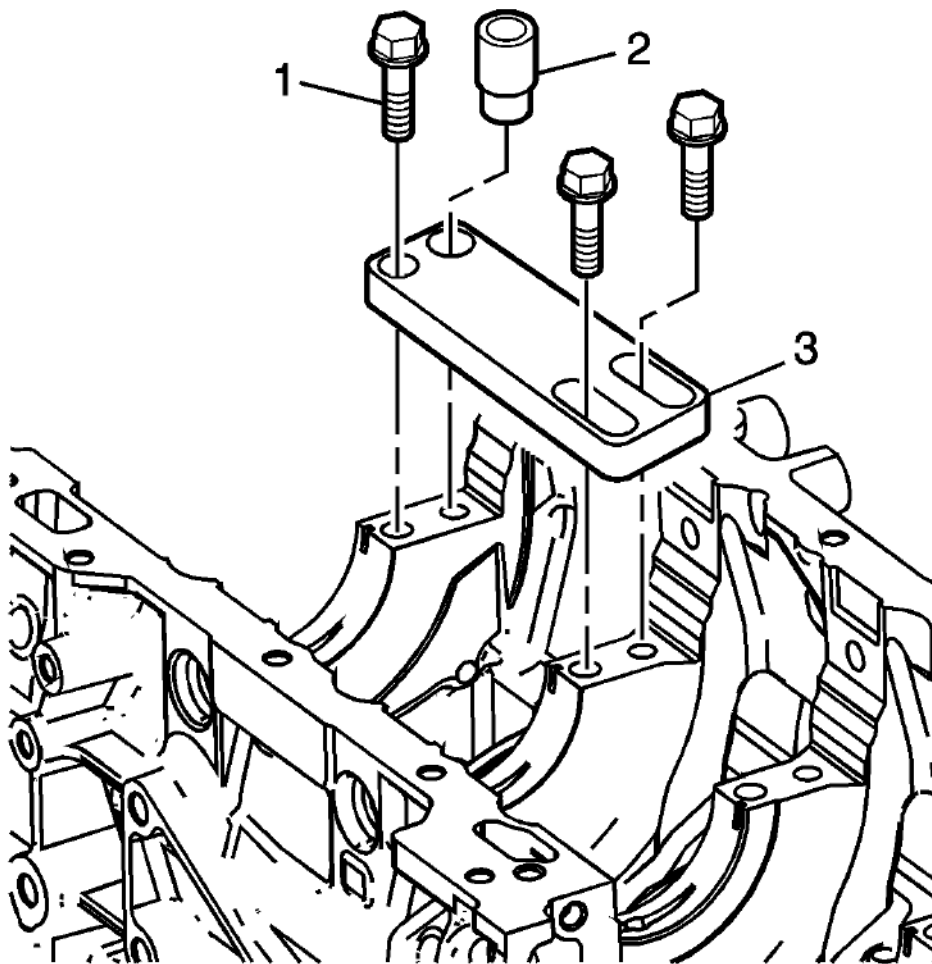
Identifying Fixture Plate Over Crankshaft Main Cap Bolt Hole
